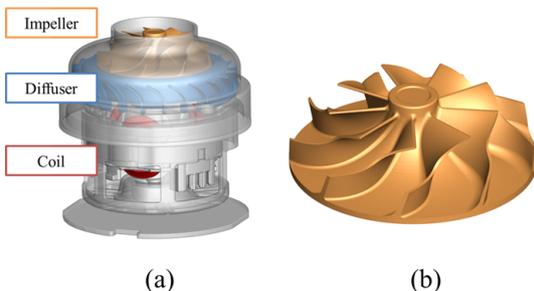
(Color available online) (a) Fan-motor unit for cordless vacuum cleaner (b) target impeller in fan-motor unit.
